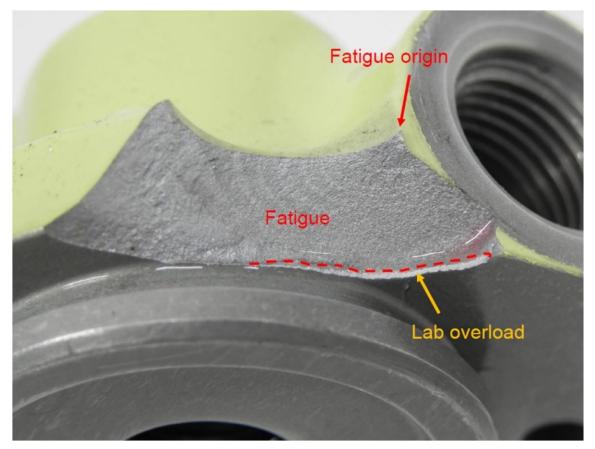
Areas of fatigue cracking identified on the forward-left lug of the pedal damper check valve housing. (Image courtesy of Sikorsky)
